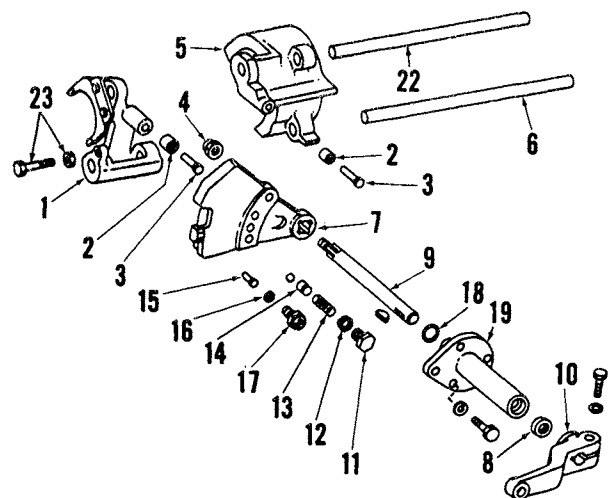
A—Exploded view of Quad-Range shifter components used on Model 4650. Refer to Fig. 122 for legend except for shift rail (22) and stop screw (23).
